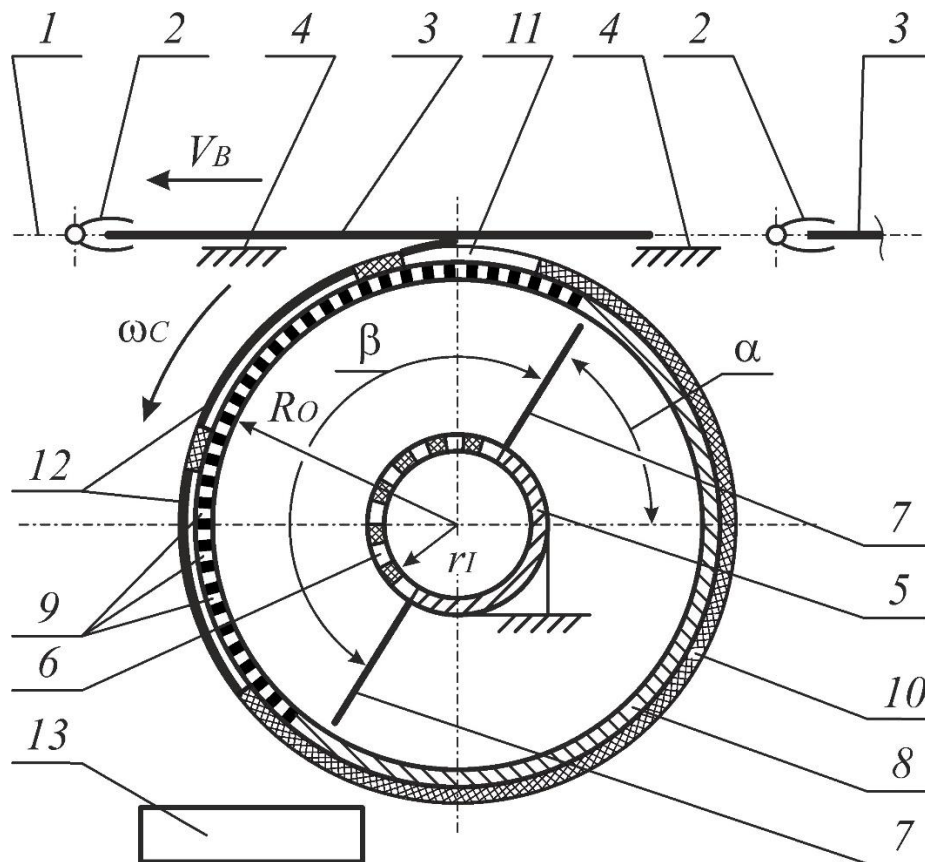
Technological scheme of the device for separation of cardboard packaging involutes from blanks.
